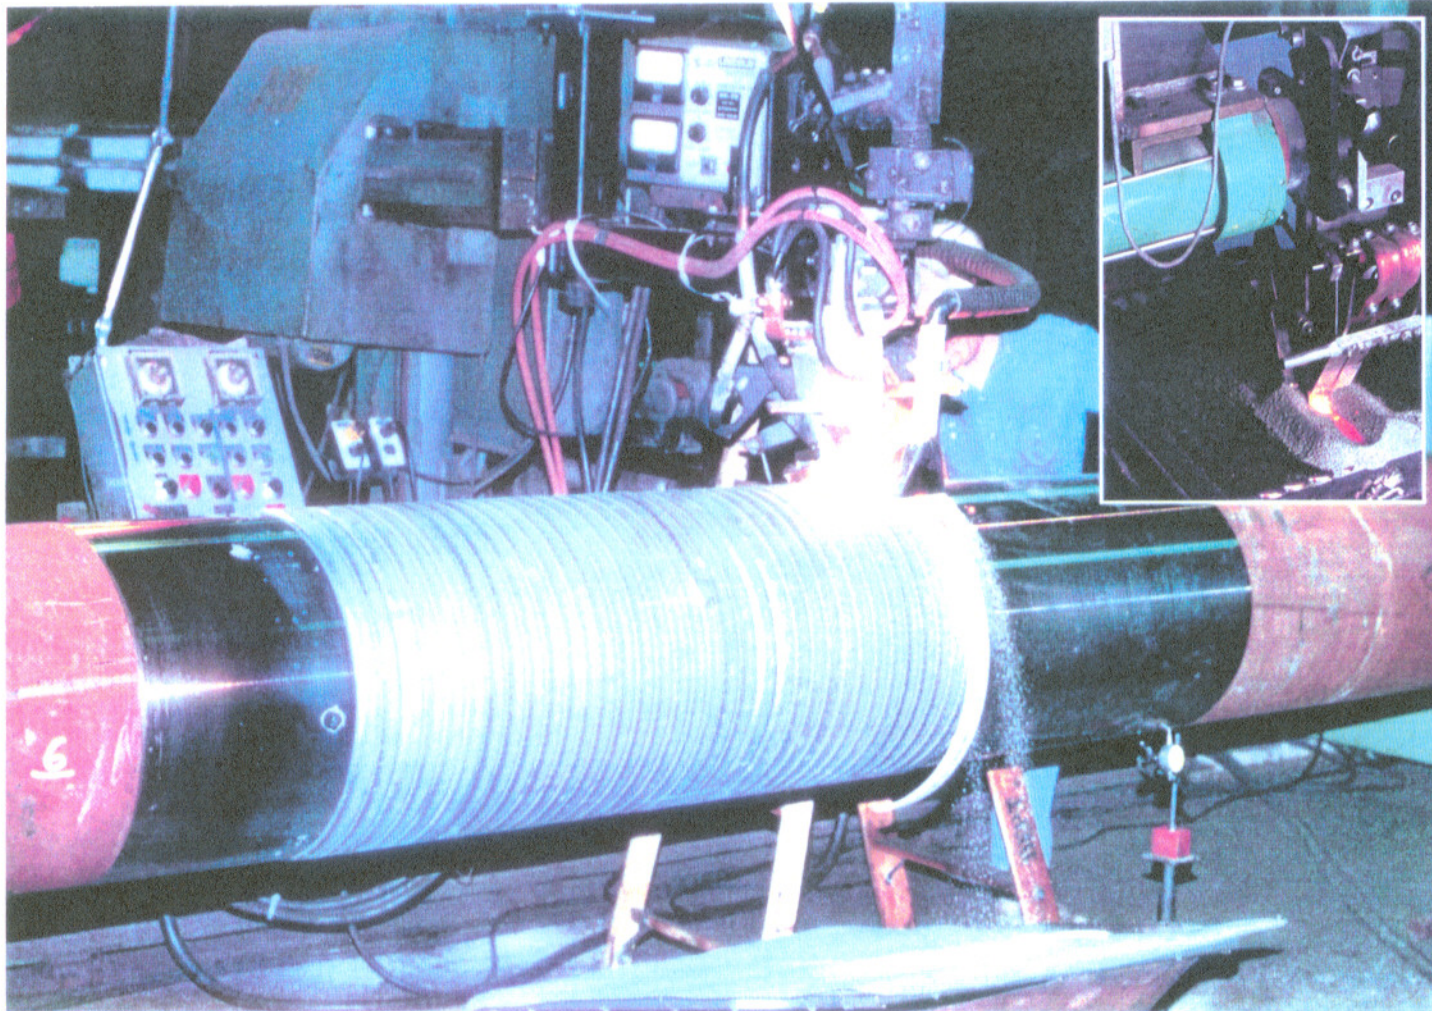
Electroslag cladding onto a propeller shaft and a flat workpiece (insert photo).
